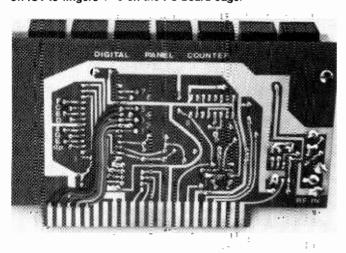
PHOTO OF THE FOIL SIDE OF THE MAIN CIRCUIT BOARD with the five jumpers and resistor R5 in place.
